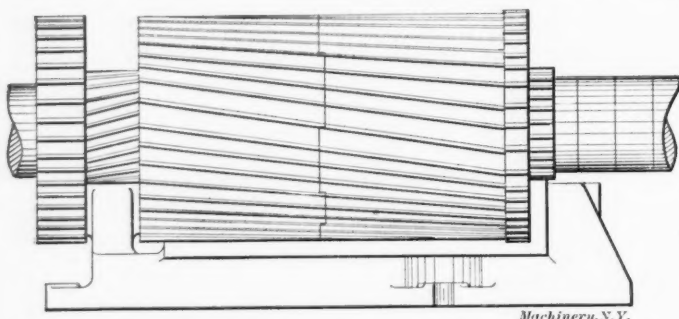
Rough milling the Top of Base, Jaw Top, Jaw Backing and Screw Bosses with Gang Cutter.
